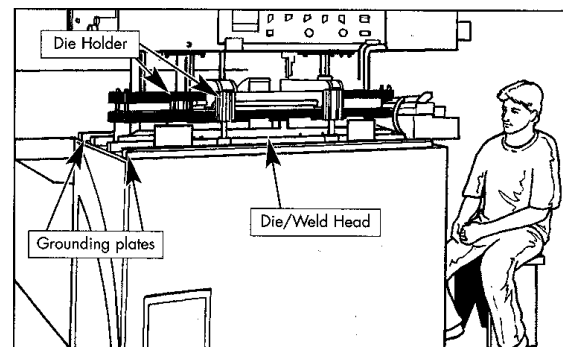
Contact with other metal parts of RF plant that can be 'live' during a weld can cause burns or shock.
